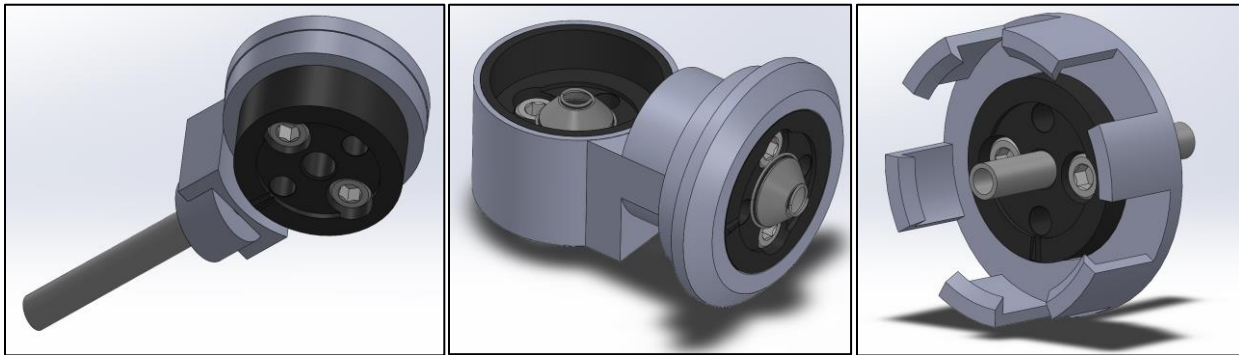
Upper housing, lower housing, and roll joint cap (left to right).
